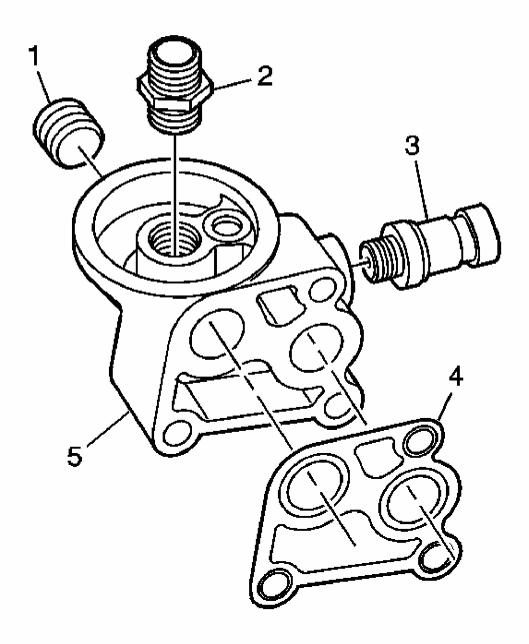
Identifying Oil Filter Adapter Components (without Oil Cooler)
